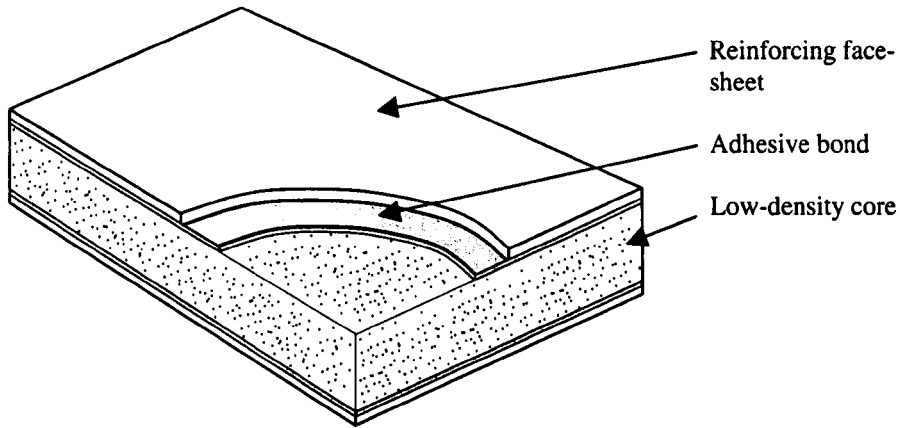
Sandwich panel construction, comprising of a low-density core reinforced by two thin, stiff face-sheets.
